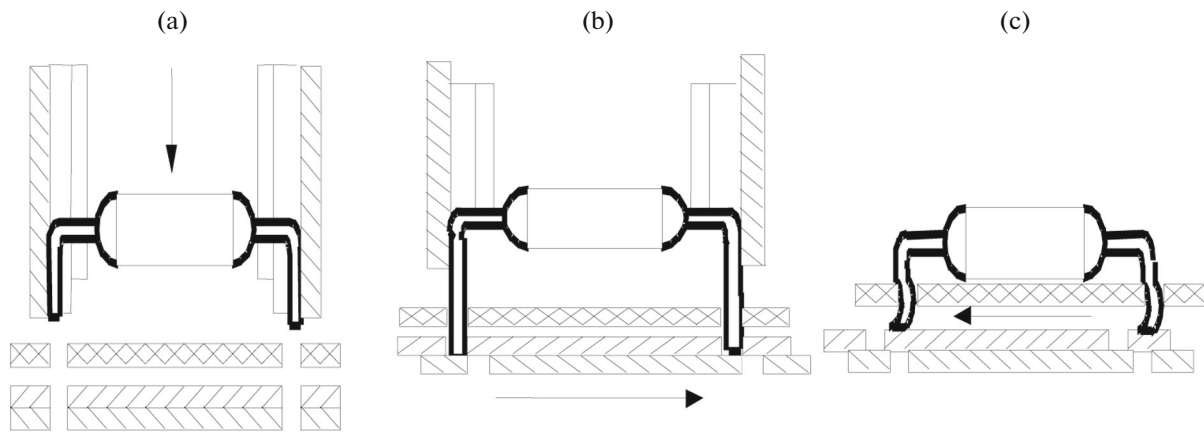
Mechanized component mounting with axial leads: (a) lead alignment, (b) lead trimming, and (c) lead bending.
